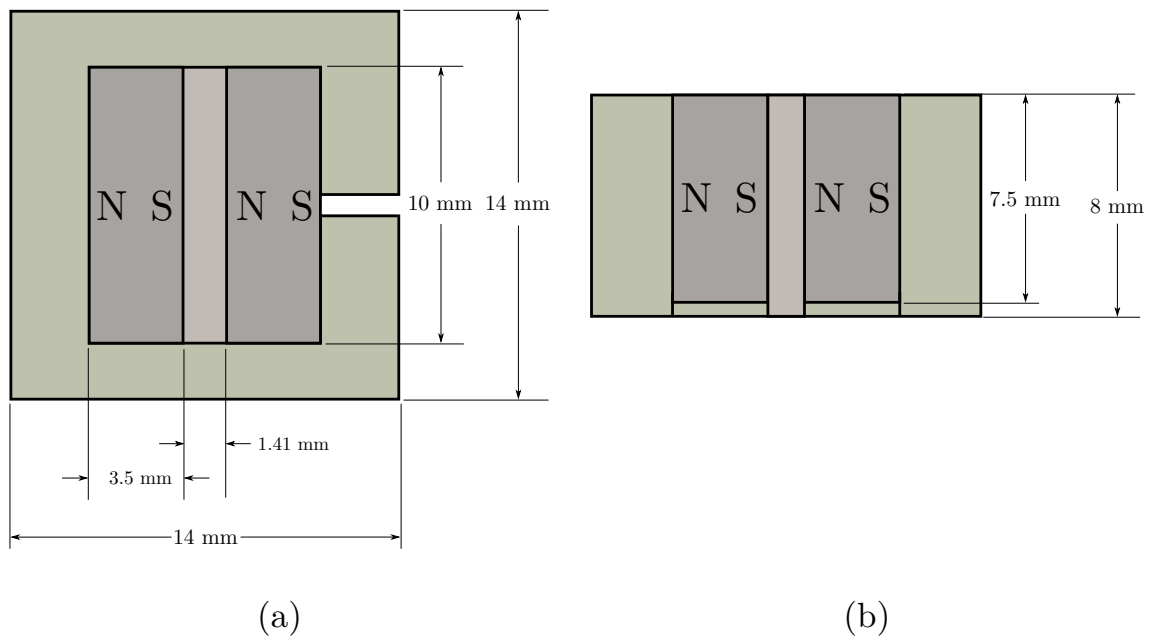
The final dimensions of the tungsten and titanium magnet spacer for (a) top down and (b) side slice views.
